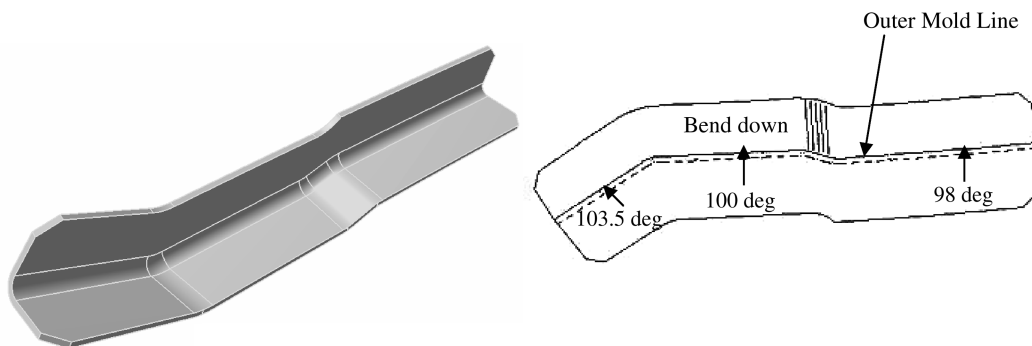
SMC with three-dimensional flange surface with inclined joggle.
